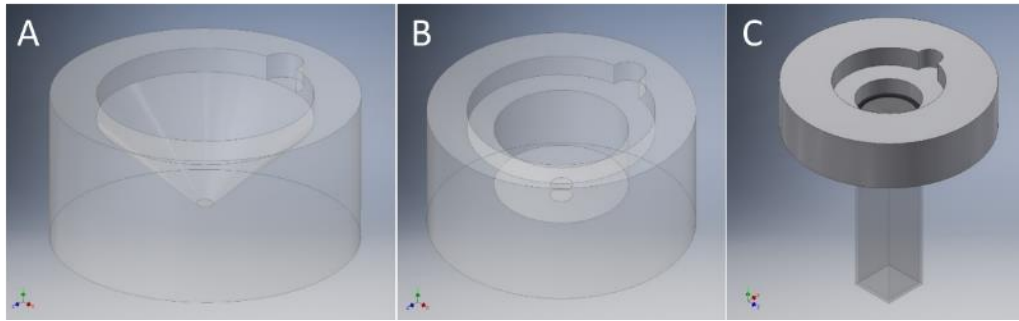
Waveguide experiment sample holders. (A) conical sample holder, (B) cylindrical sample holder, (C) cuvette sample holder
